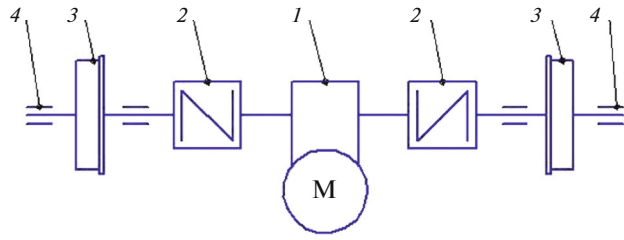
Kinematic diagram of the updated drive for the mechanism moving the screens: (1) gear motor; (2) closed coupling; (3) drive wheels; (4) bearings.
